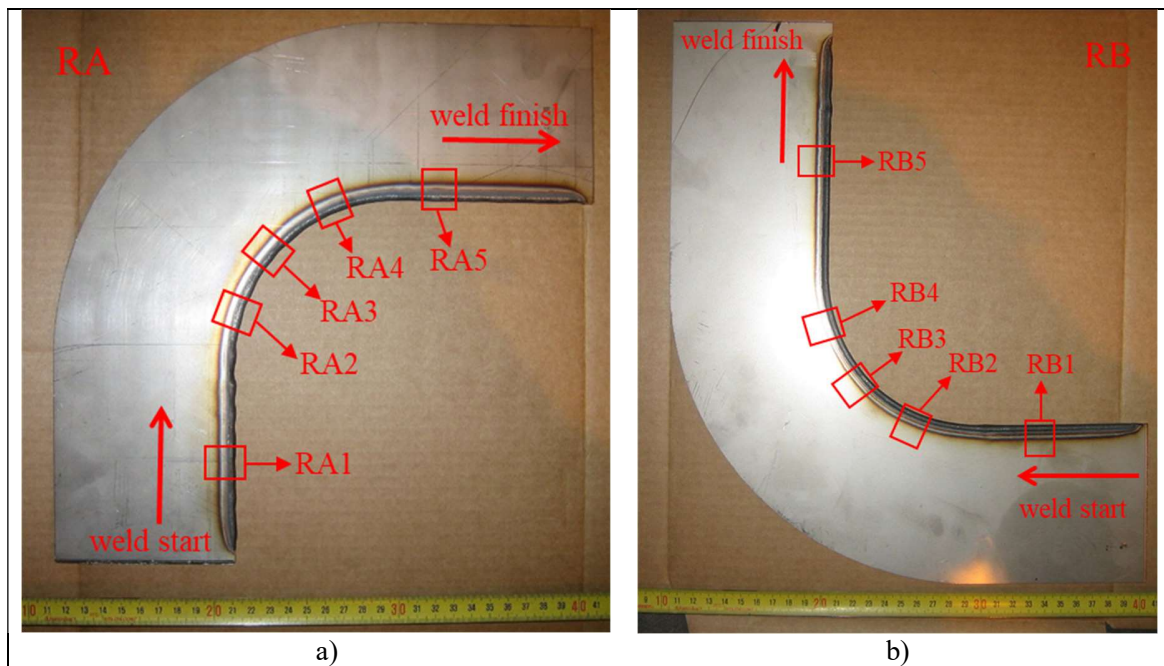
Edge joint weld produced in test specimen RA (a) and RB (b). The red boxes indicate the locations from which the macro cross-sectional samples of the weld were cut.
